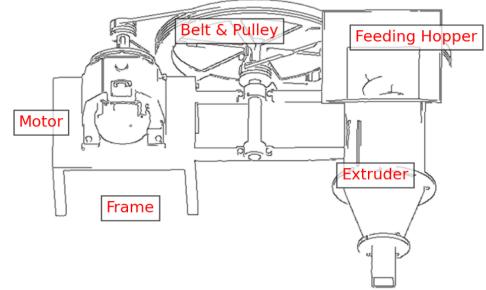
Sketch of logs making machine Table 1. Specifications of log-making machine
